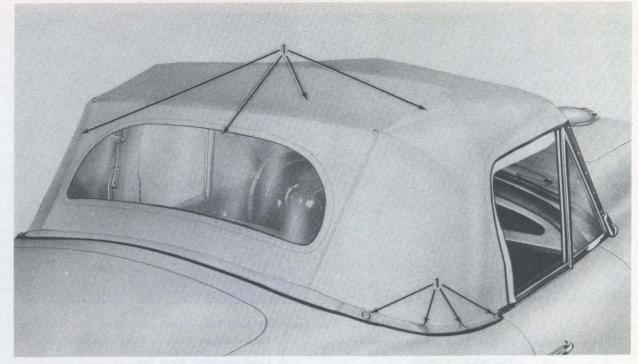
F-Top Covering and Back Curtain Assembly including Side Quarter Fasteners (Rear View).
